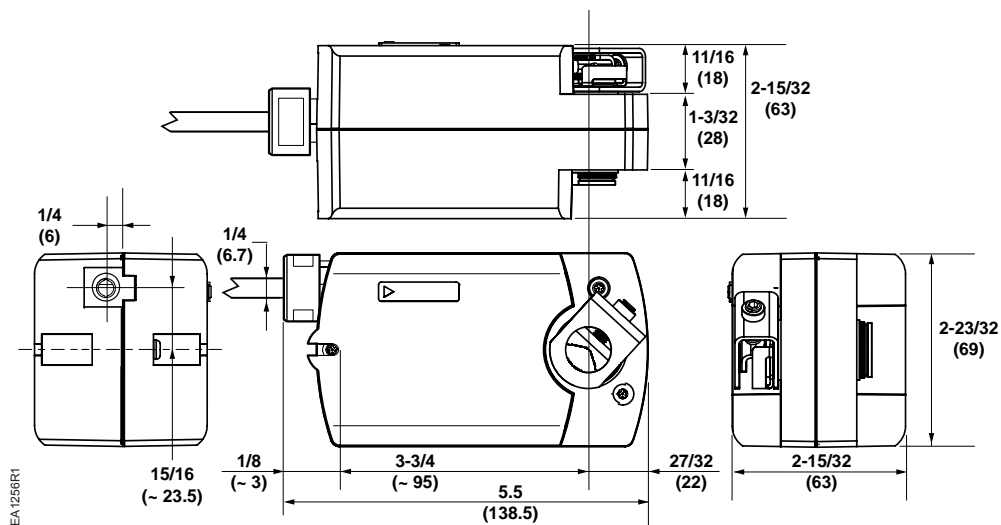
GQD 221.1U Actuator Only, Dimensions in Inches (Millimeters).
